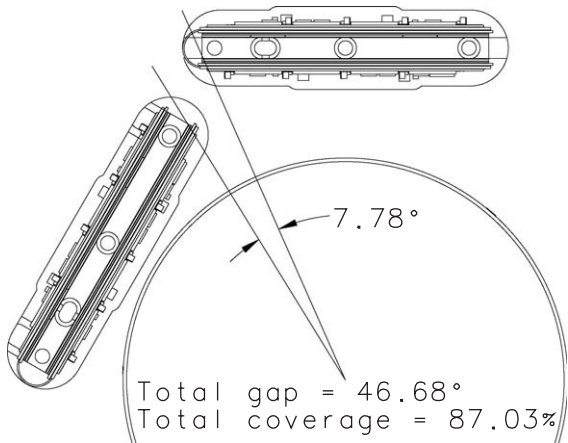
End view detail showing the 7.8° gap between adjacent L1 supermodules.
